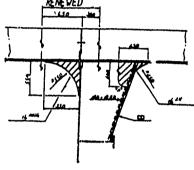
Repairs to Side Shell Longitudinals (Reinforced with Soft Toe Brackets)
